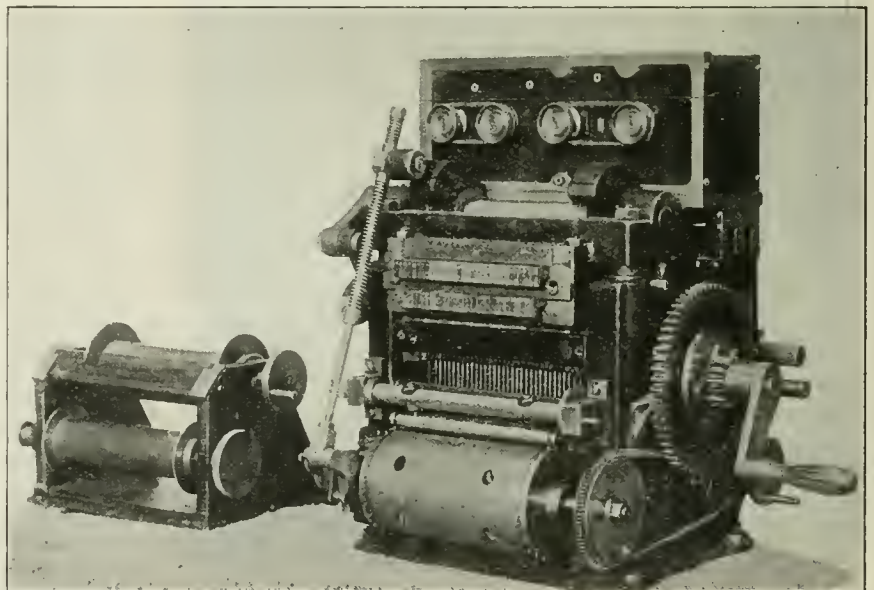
MECHANISM FOR PUNCHING PAPER TEMPLATES USED IN AUTOMATIC PUNCHING MACHINE SHOWN IN FIG. 6. THE PUNCHED TEMPLATE IS CHECKED ON THE ROLLS SHOWN AT THE LEFT
